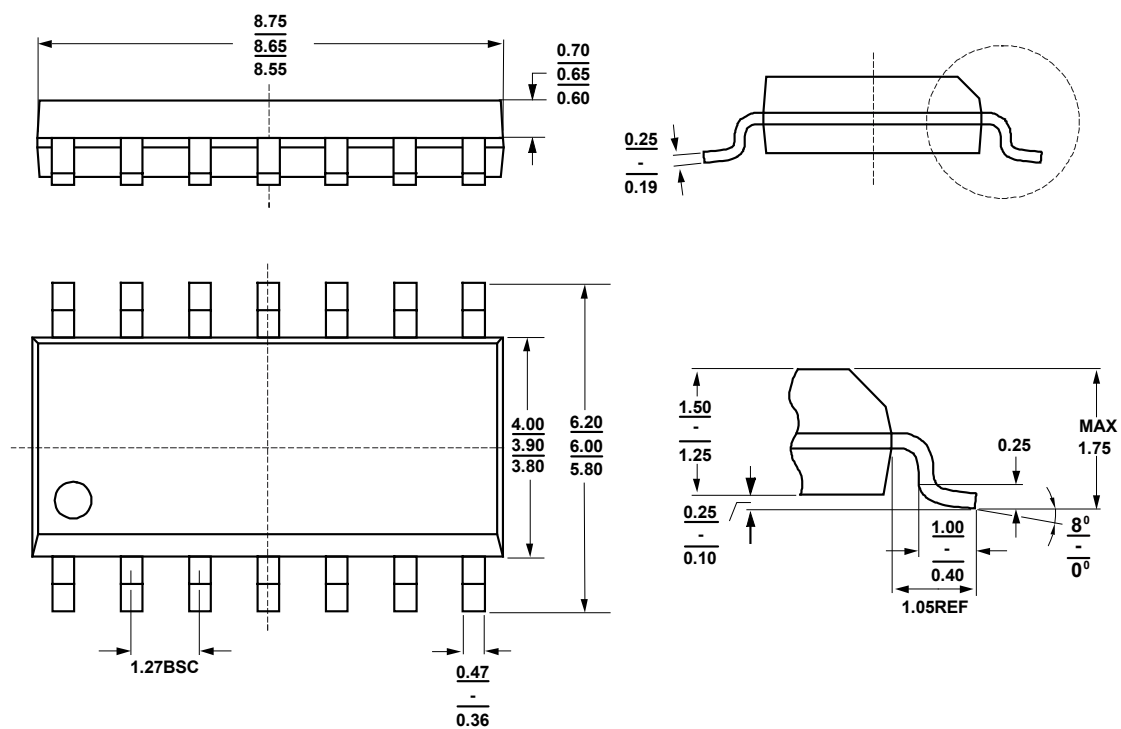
14-Lead SOIC Package Dimensions shown in millimeters
